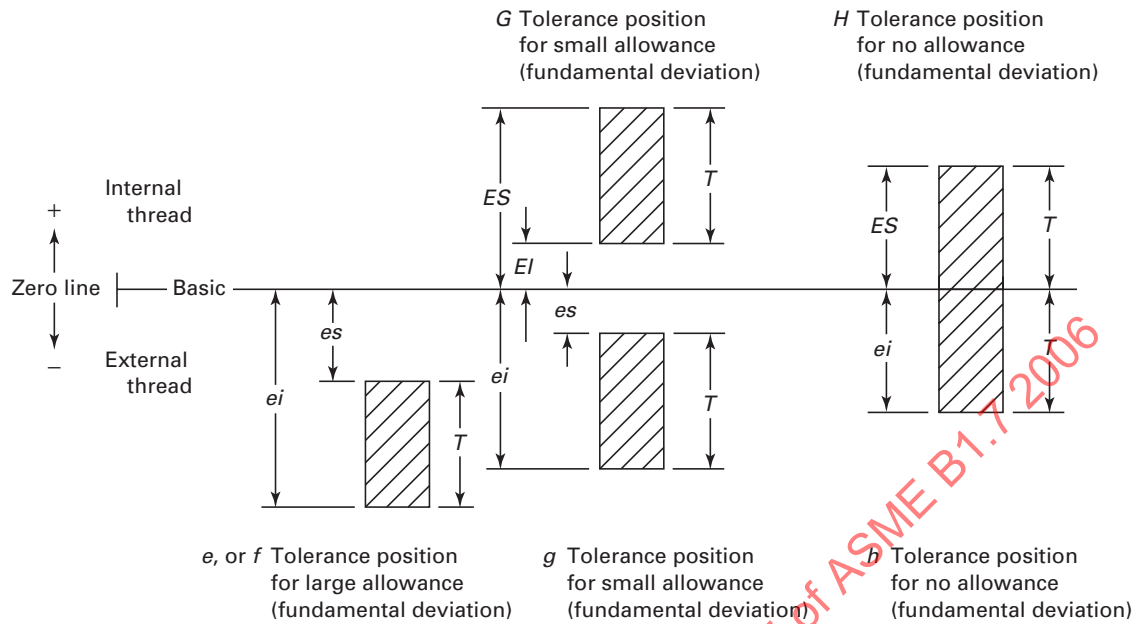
Metric Tolerance System for Screw Threads
